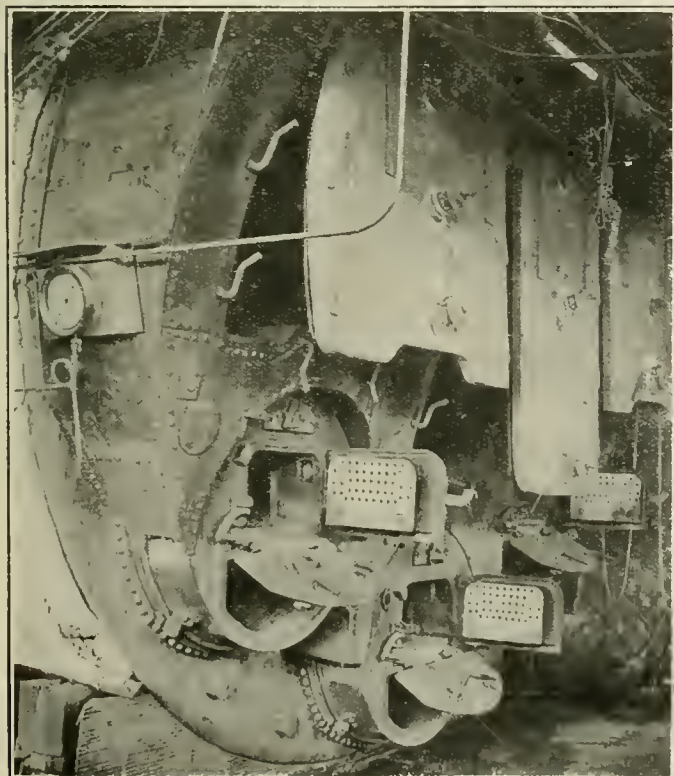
SCOTCH MARINE BOILER AS FITTED FOR HAND-FIRED COAL-BURNING TEST
